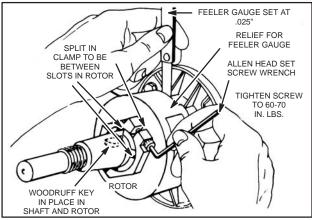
INSTALLING ROTOR (WITH CLAMP)
